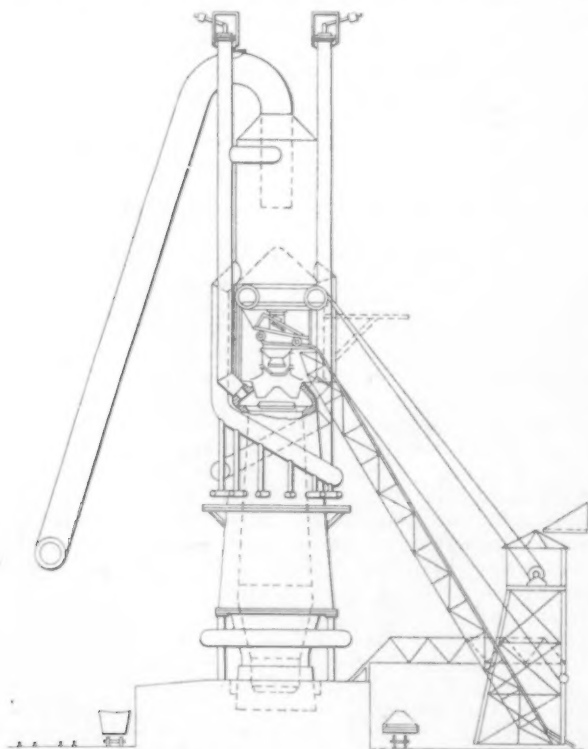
Modern Blast Furnace with Attachment to Convey Dust to Feeding Mechanism
